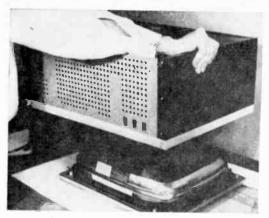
Picture tube is assembled to cabinet, sandwich style. Tube and cabinet are one after assembly.
